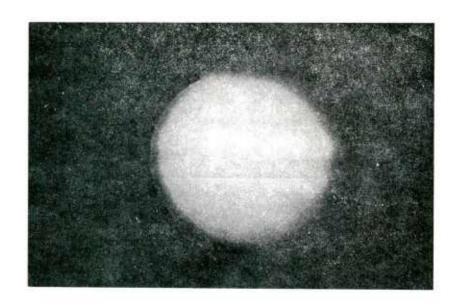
RADIOGRAPHY - MILD POROSITY IN WELD A/PT9
